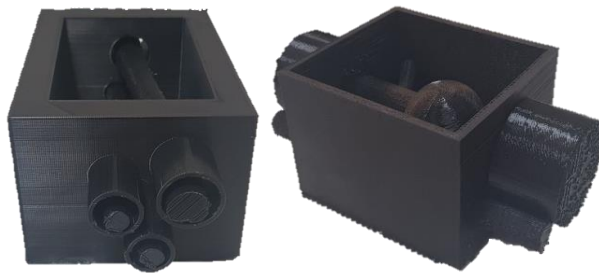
Silicon rubber molds(a) Femoral and (b) heart pad mold.
